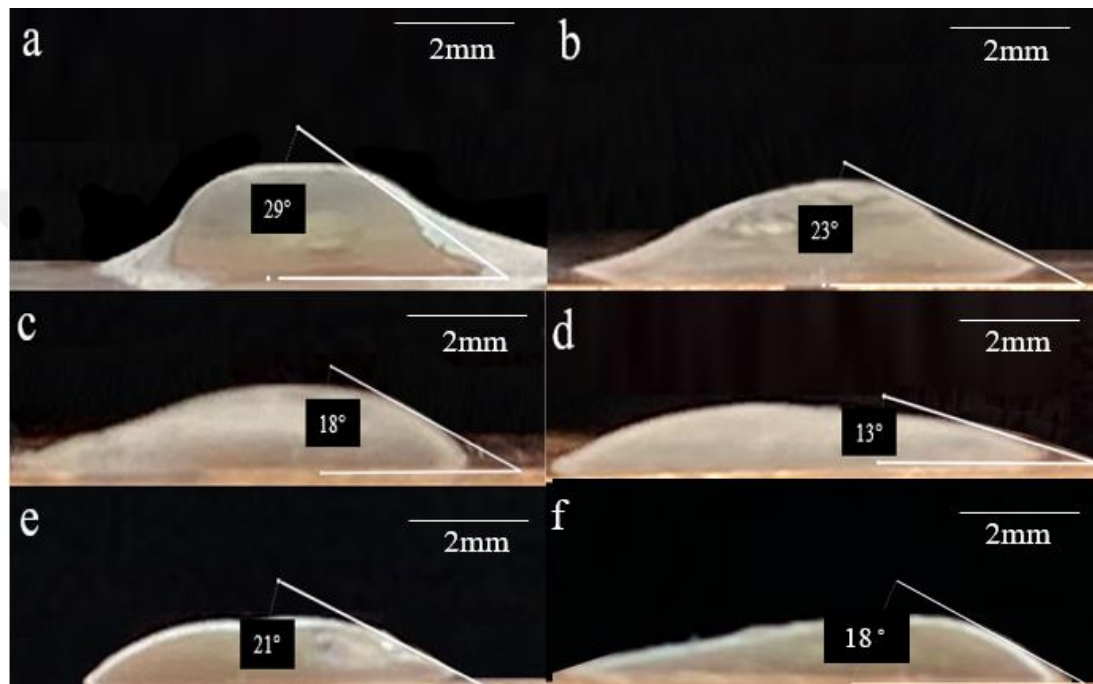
Solder contact angle, (a) Epoxy-free Sn-Bi solder, (b) Sn-58Bi solder containing 1 wt.% epoxy, (c) Sn-58Bi solder containing 3 wt.% epoxy, (d) Sn-58Bi solder containing 5 wt.% epoxy, (e) Sn-58Bi solder containing 7 wt.% epoxy, (f) Sn-58Bi solder containing 9 wt.% epoxy
